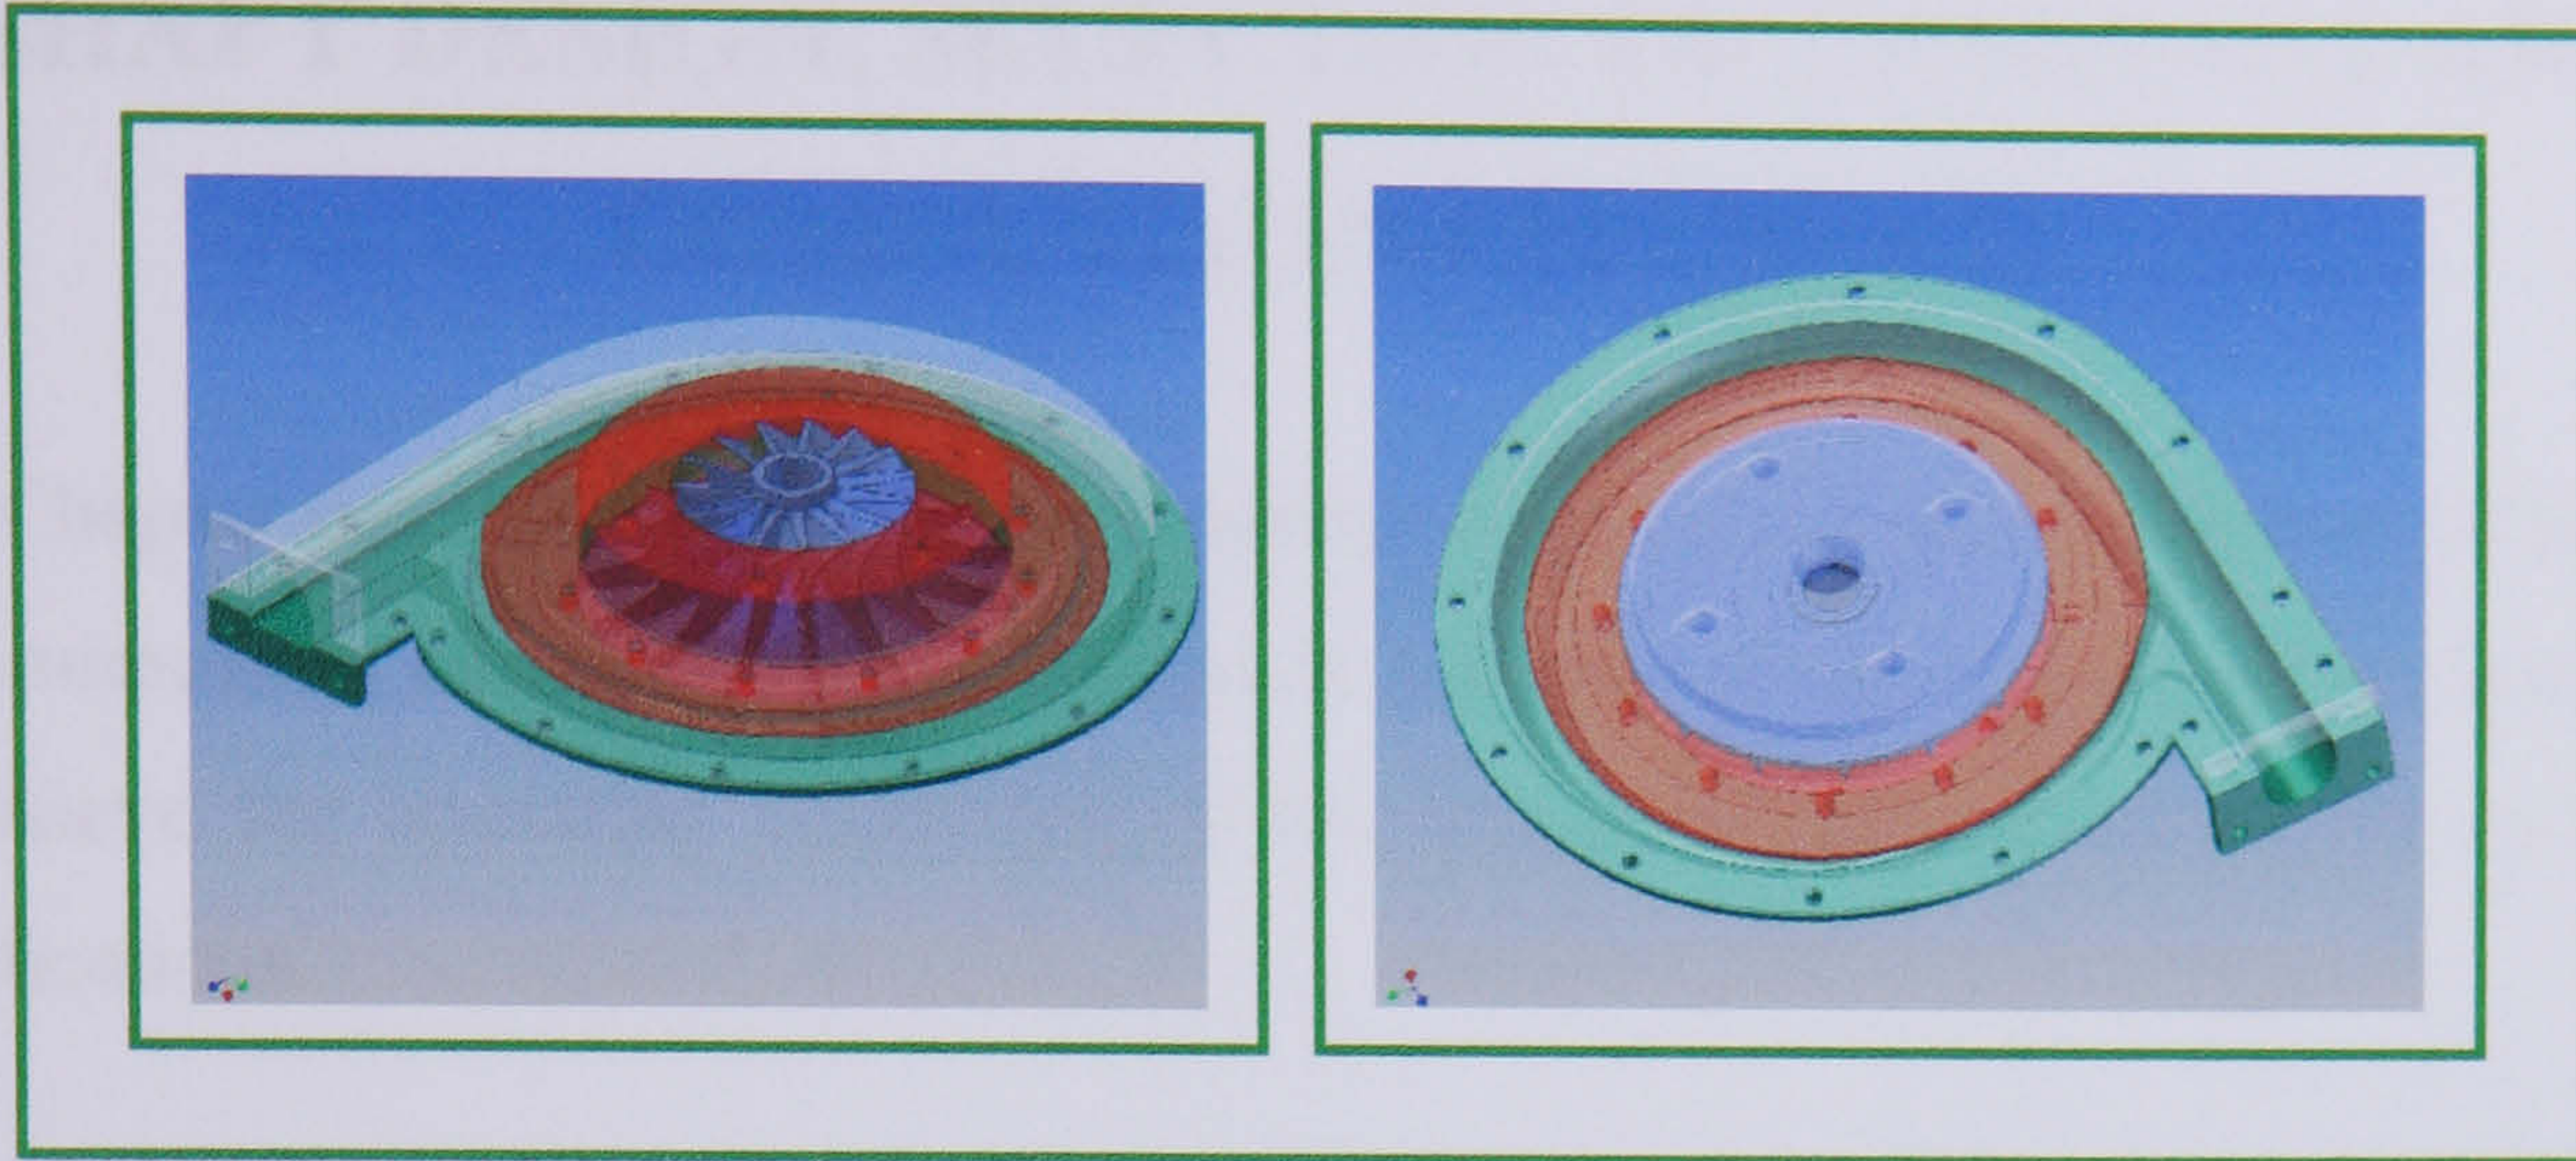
THREE-DIMENSIONAL SOLID MODEL OF THE CENTRIFUGAL COMPRESSOR ASSEMBLY
